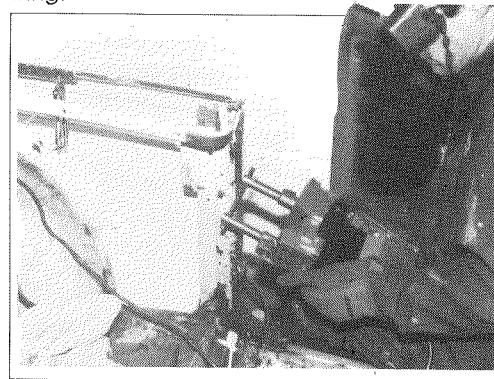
Any welding shown so far has been exclusively carried out by MIG welding. Many years ago before the advent of good affordable DIY MIG welders, I had bought a spot welder so I took the opportunity to try it out having properly plumbed it in to a 30 Amp cooker style connection point in the garage. My conclusion is that if you have a MIG don't buy a spot welder as the latter is very heavy, cumbersome, to do anything more than the simplest of jobs you need a range of different shaped arms and the welding tips are in almost continual need of being cleaned up. Having said that, it did give strong, professional spot welds in this application but all in all I found plug welding to much easier on the muscles and ultimately quicker.
